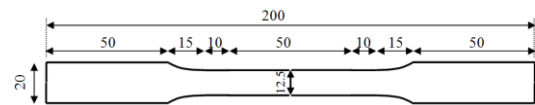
Dimensions of the test specimen for tensile coupons in mm [31]
